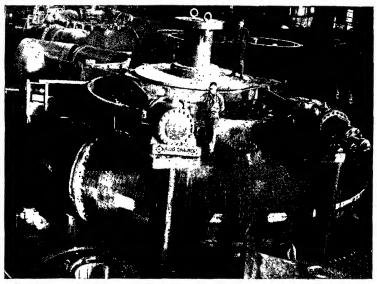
Assembly view of 115,000-hp. turbines for Boulder Dam; 490-ft. head, 150 to 180 r.p.m., using about 2500 c.f.s. Cast-steel, one-piece runner 166 in. nominal diameter; shaft 38 in. in diameter. Cast-steel casings in six sections, total weight about 500,000 lb. Casing inlet, 10 ft. diameter. Each turbine uses a pressure regulator to prevent surges when load is suddenly removed. (Courtesy of Allis-Chalmers Manufacturing Co.)
